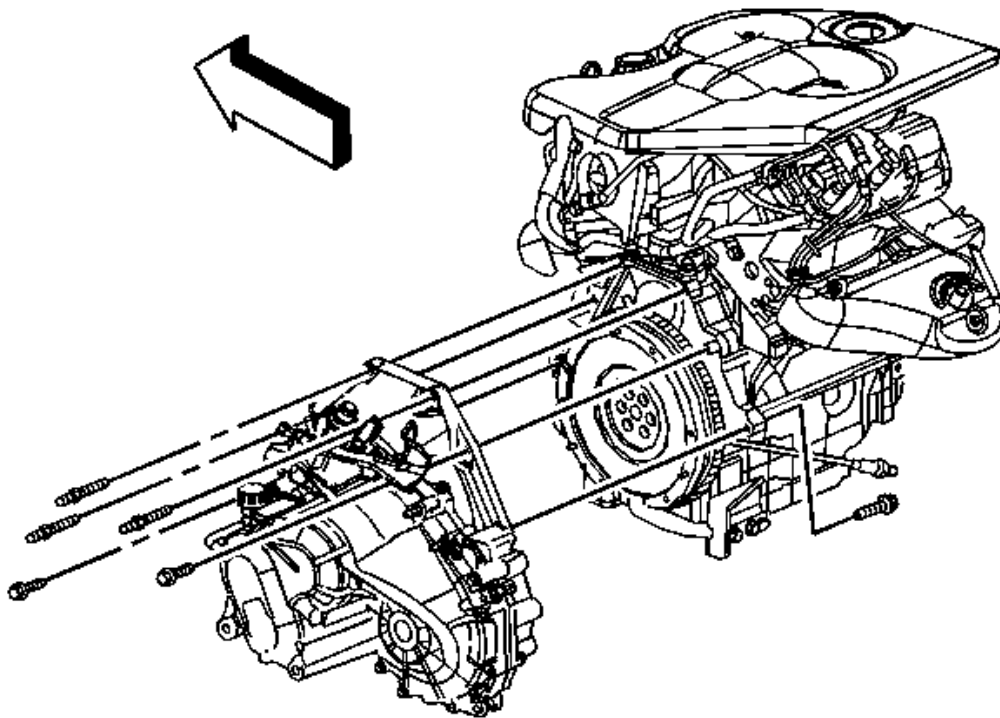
Transaxle-To-Engine Bolts/Studs (M/T)
